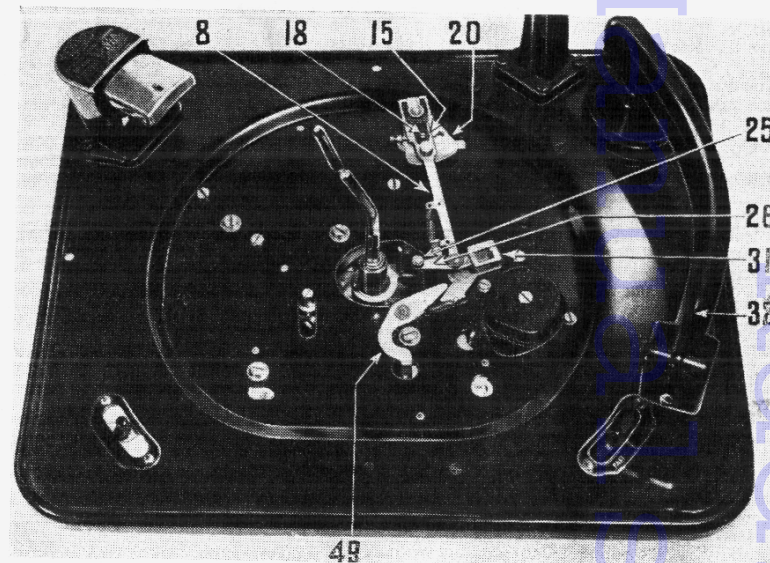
With turntable removed the auto-stop mechanism is exposed. See also the diagrams on page 2
